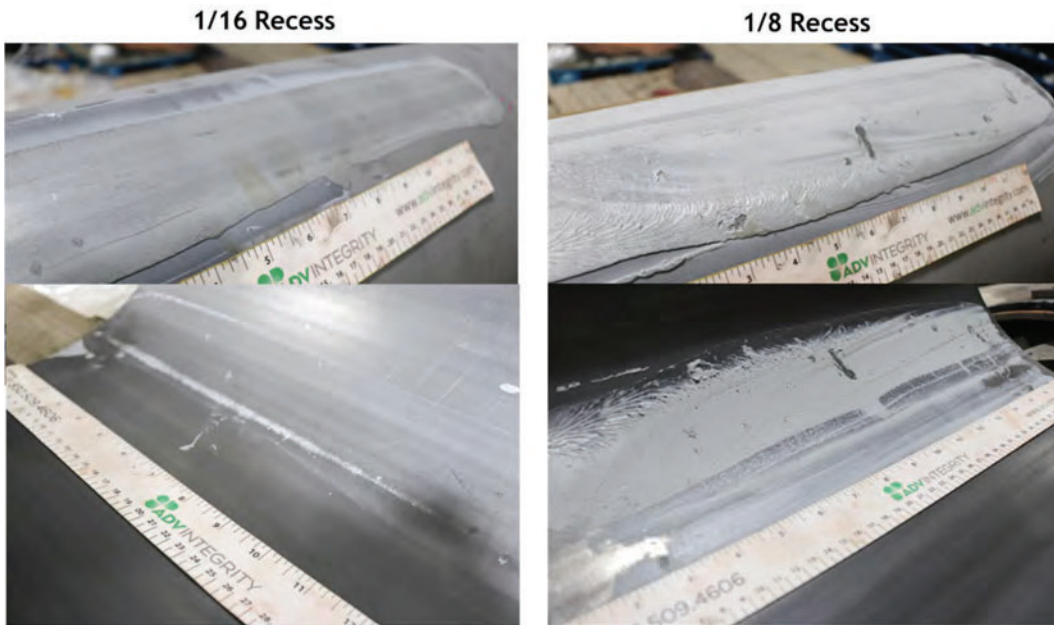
Photograph of filler material after removing the sleeve. Top photos are external surface of the pipe. Bottom photos are internal surface of the sleeve.
